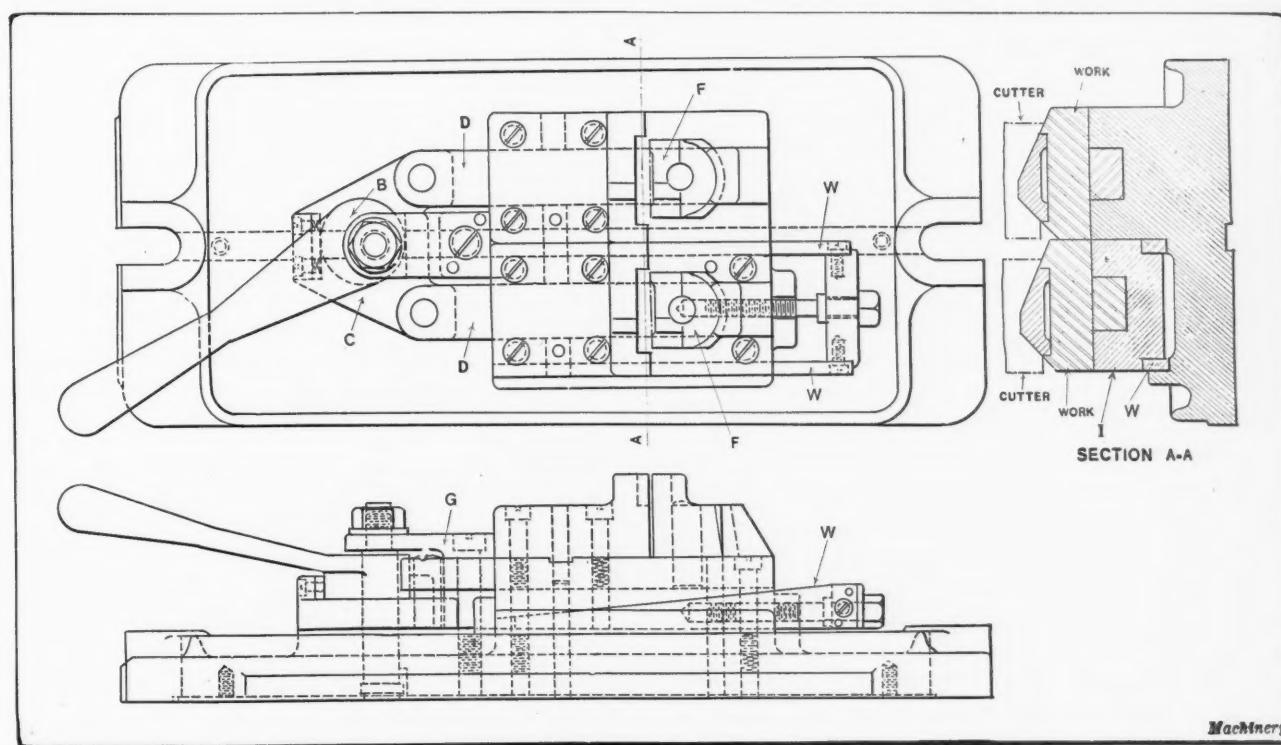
Fixture Similar to that shown in Fig. 2, but with only One Cam for clamping the Work
